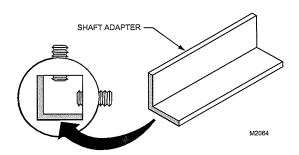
Using shaft adapter for 3/8 in. (10 mm) shafts.
